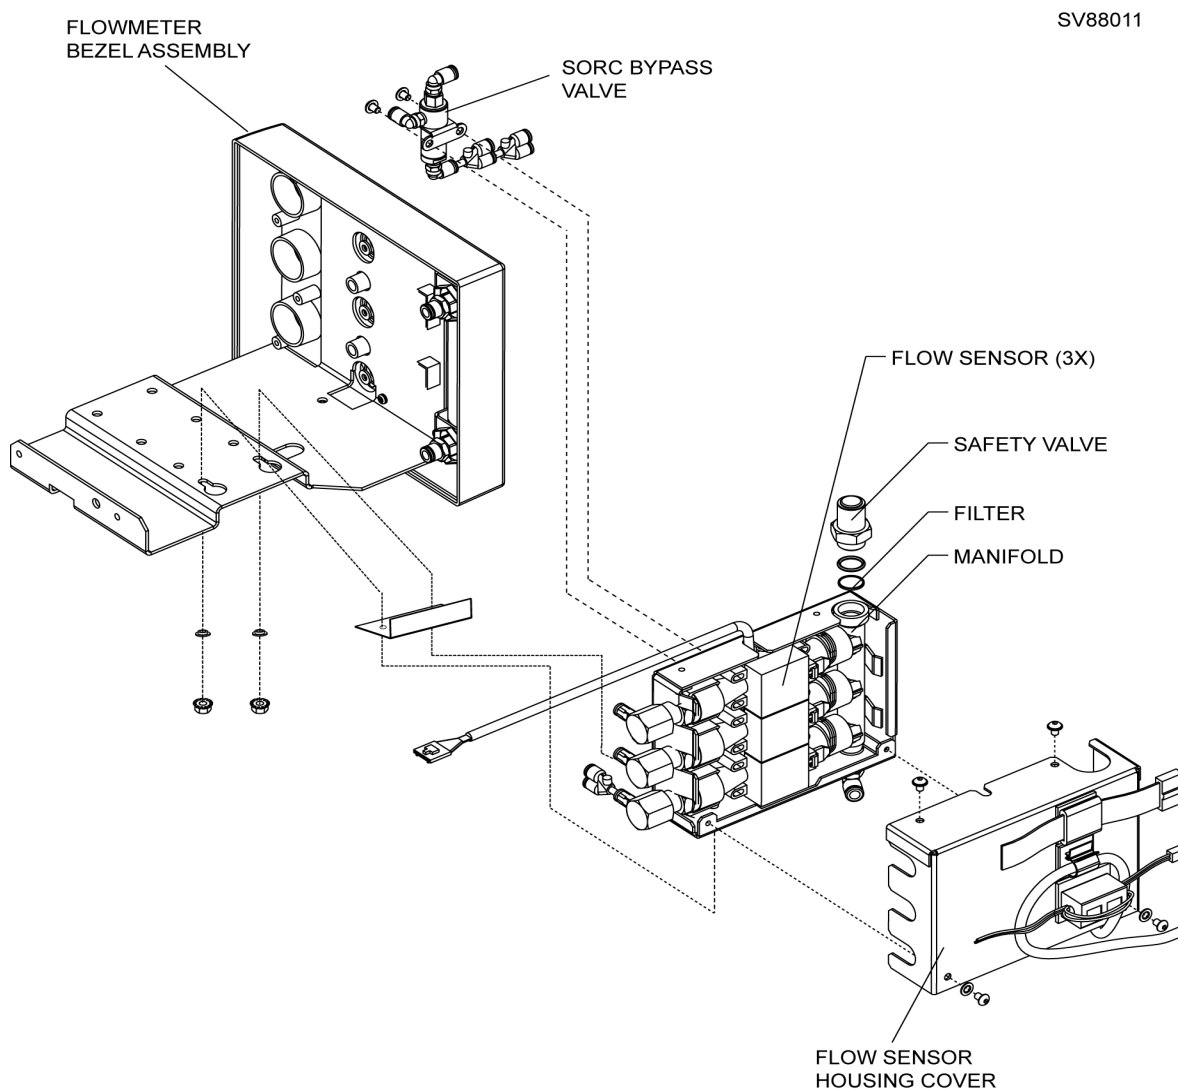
Fresh Gas Flow Sensors and Filter Assembly
